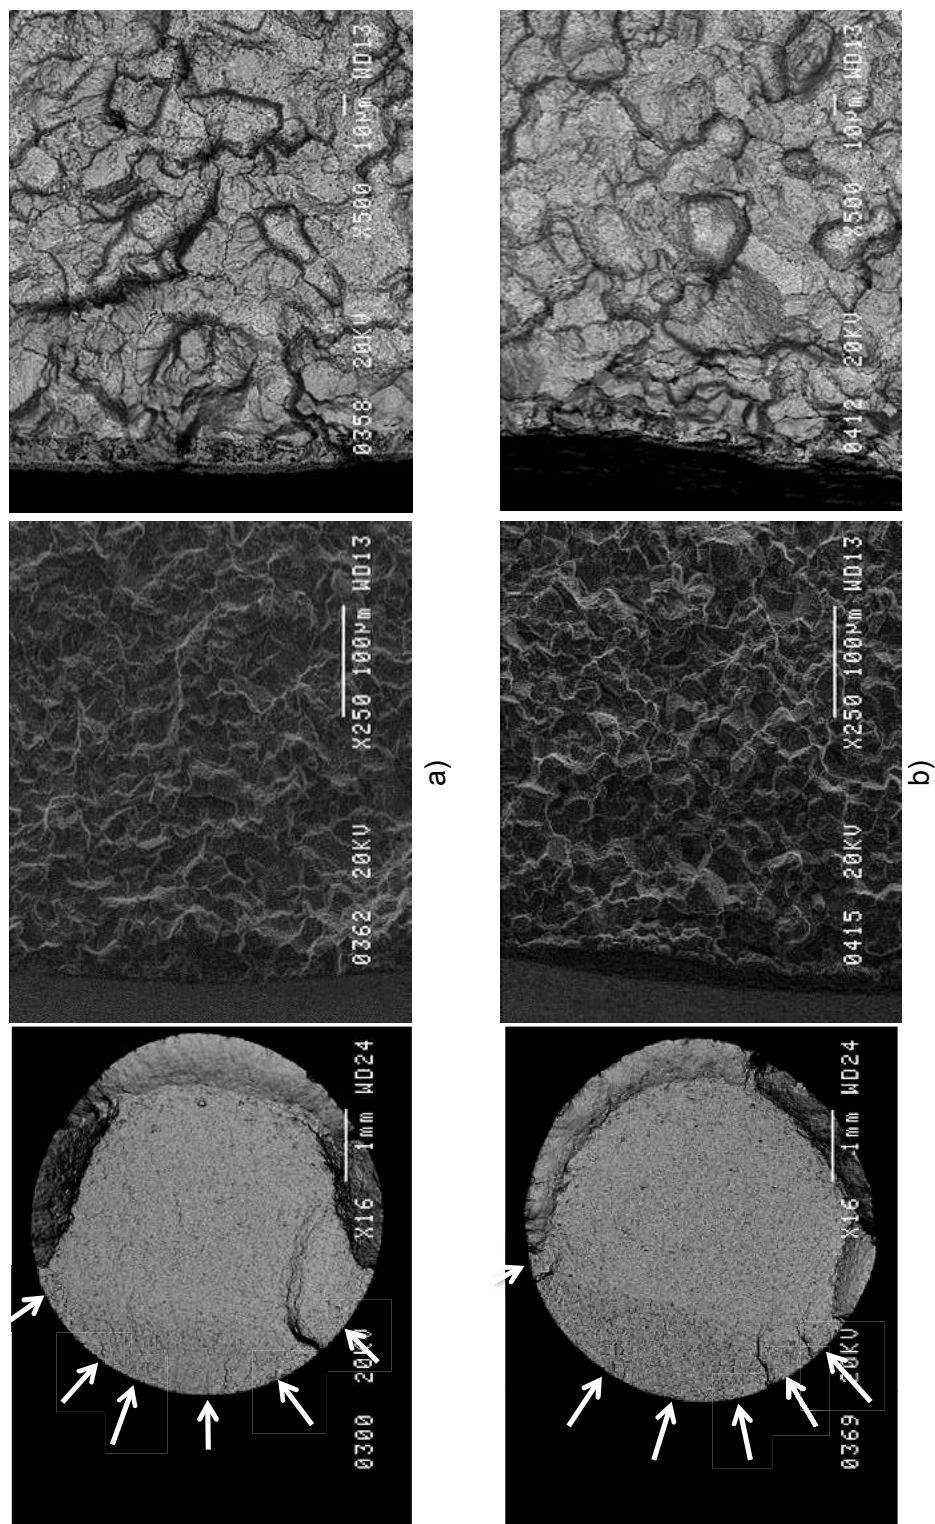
Typical fracture surfaces showing intergranular crack initiation and growth for LSHR group H specimens:
